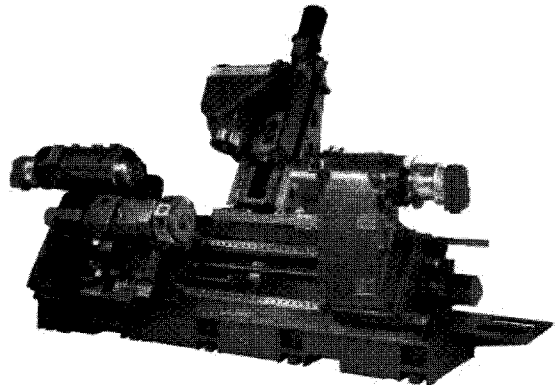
Multi-Path Multi-Tasking Machine Tools
